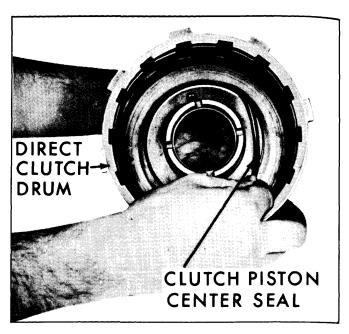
Removing Direct Clutch Piston Center Seal on Drum
